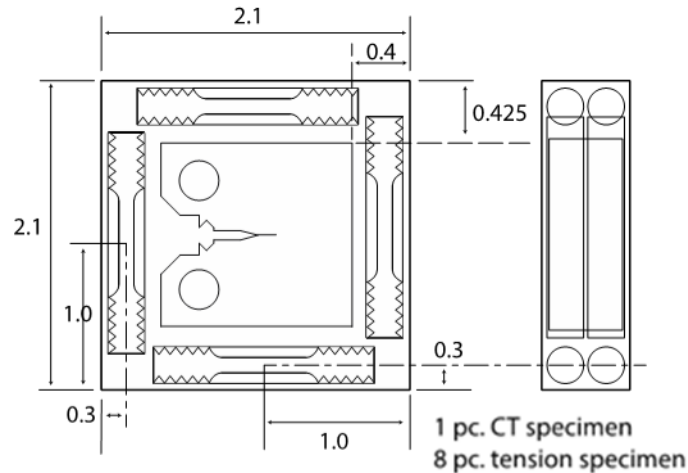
Drawing of test specimen that are designed to be machined out of the LENS part that was made in these experiments. The 2.1" x 2.1" x .6" block is designed to have 8 tensile specimens, and 1 compact tension specimen.
